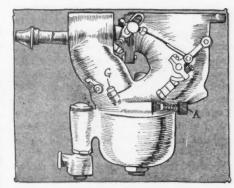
SHOWING ADJUSTMENTS OF MARVEL CARBURETER
